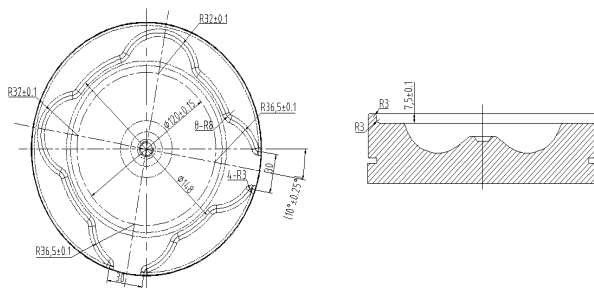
Two-dimensional drawing of equirectangular piston valve avoidance pit
